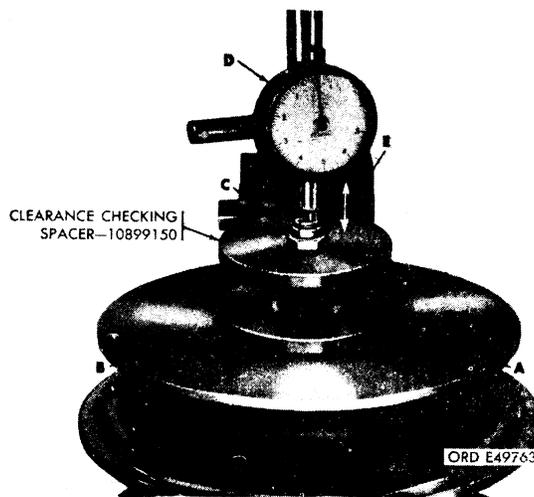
CHECKING SHAFT AND TURBINE WHEEL END PLAY.
